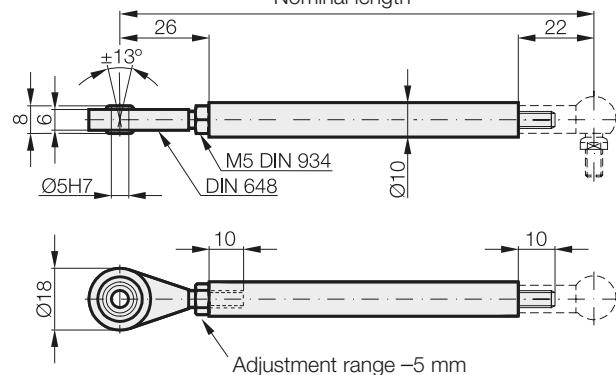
BTL2-GS10_ _-_A joint rod
